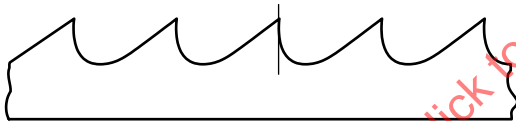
REGULAR OR STANDARD TOOTH FORM
